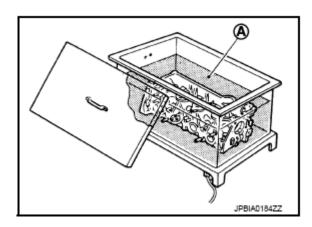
Heating Cylinder Head Using Heated Oil Courtesy of NISSAN NORTH AMERICA, INC.
